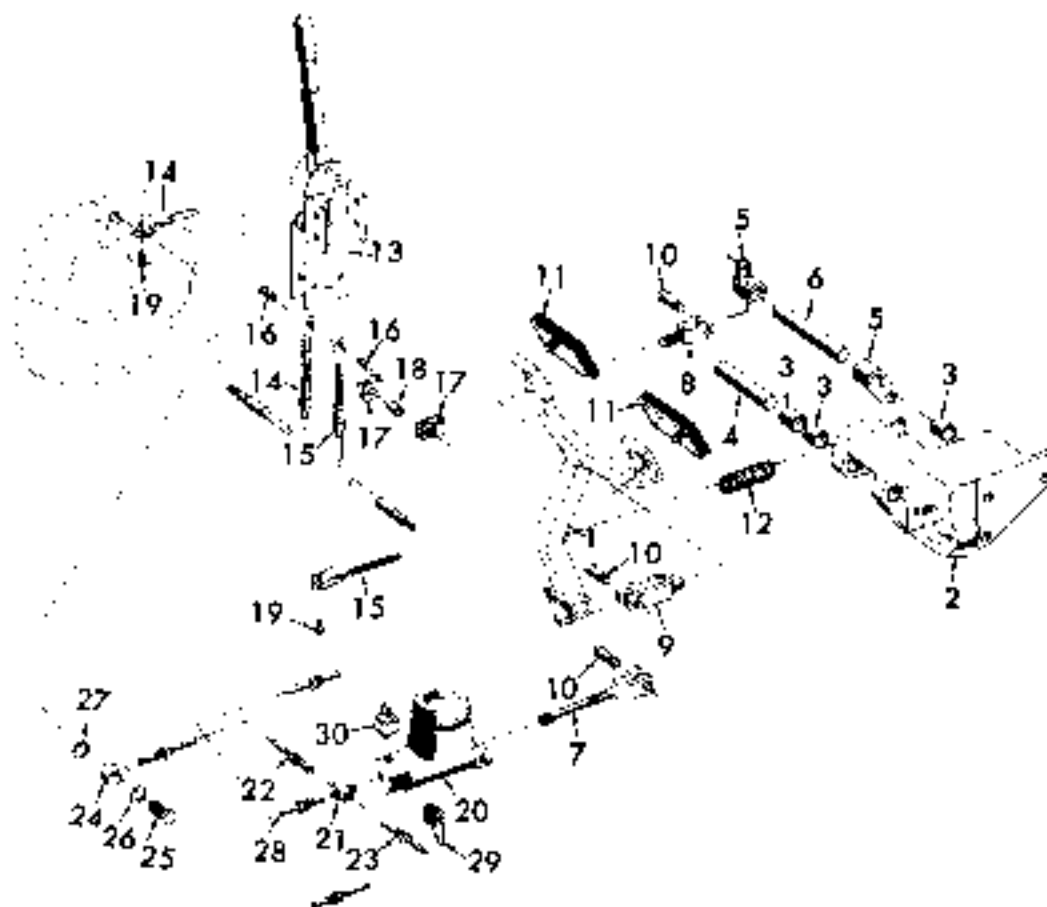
BRAKE LINKAGE AND MASTER CYLINDER
